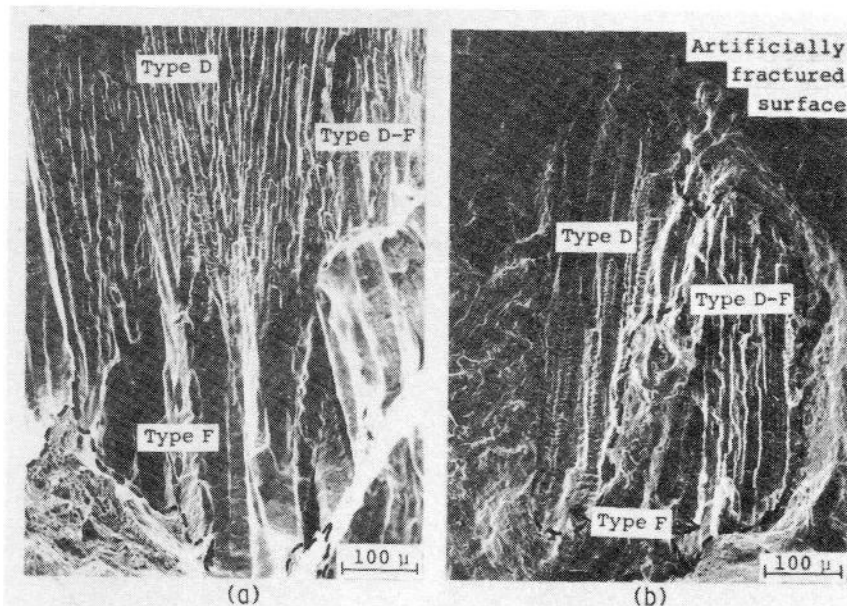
SEM micrographs of crack surface in SUS 310S-(A) weld metal made by resistance spot welding;---(a) part of large crack and (b) small crack.
